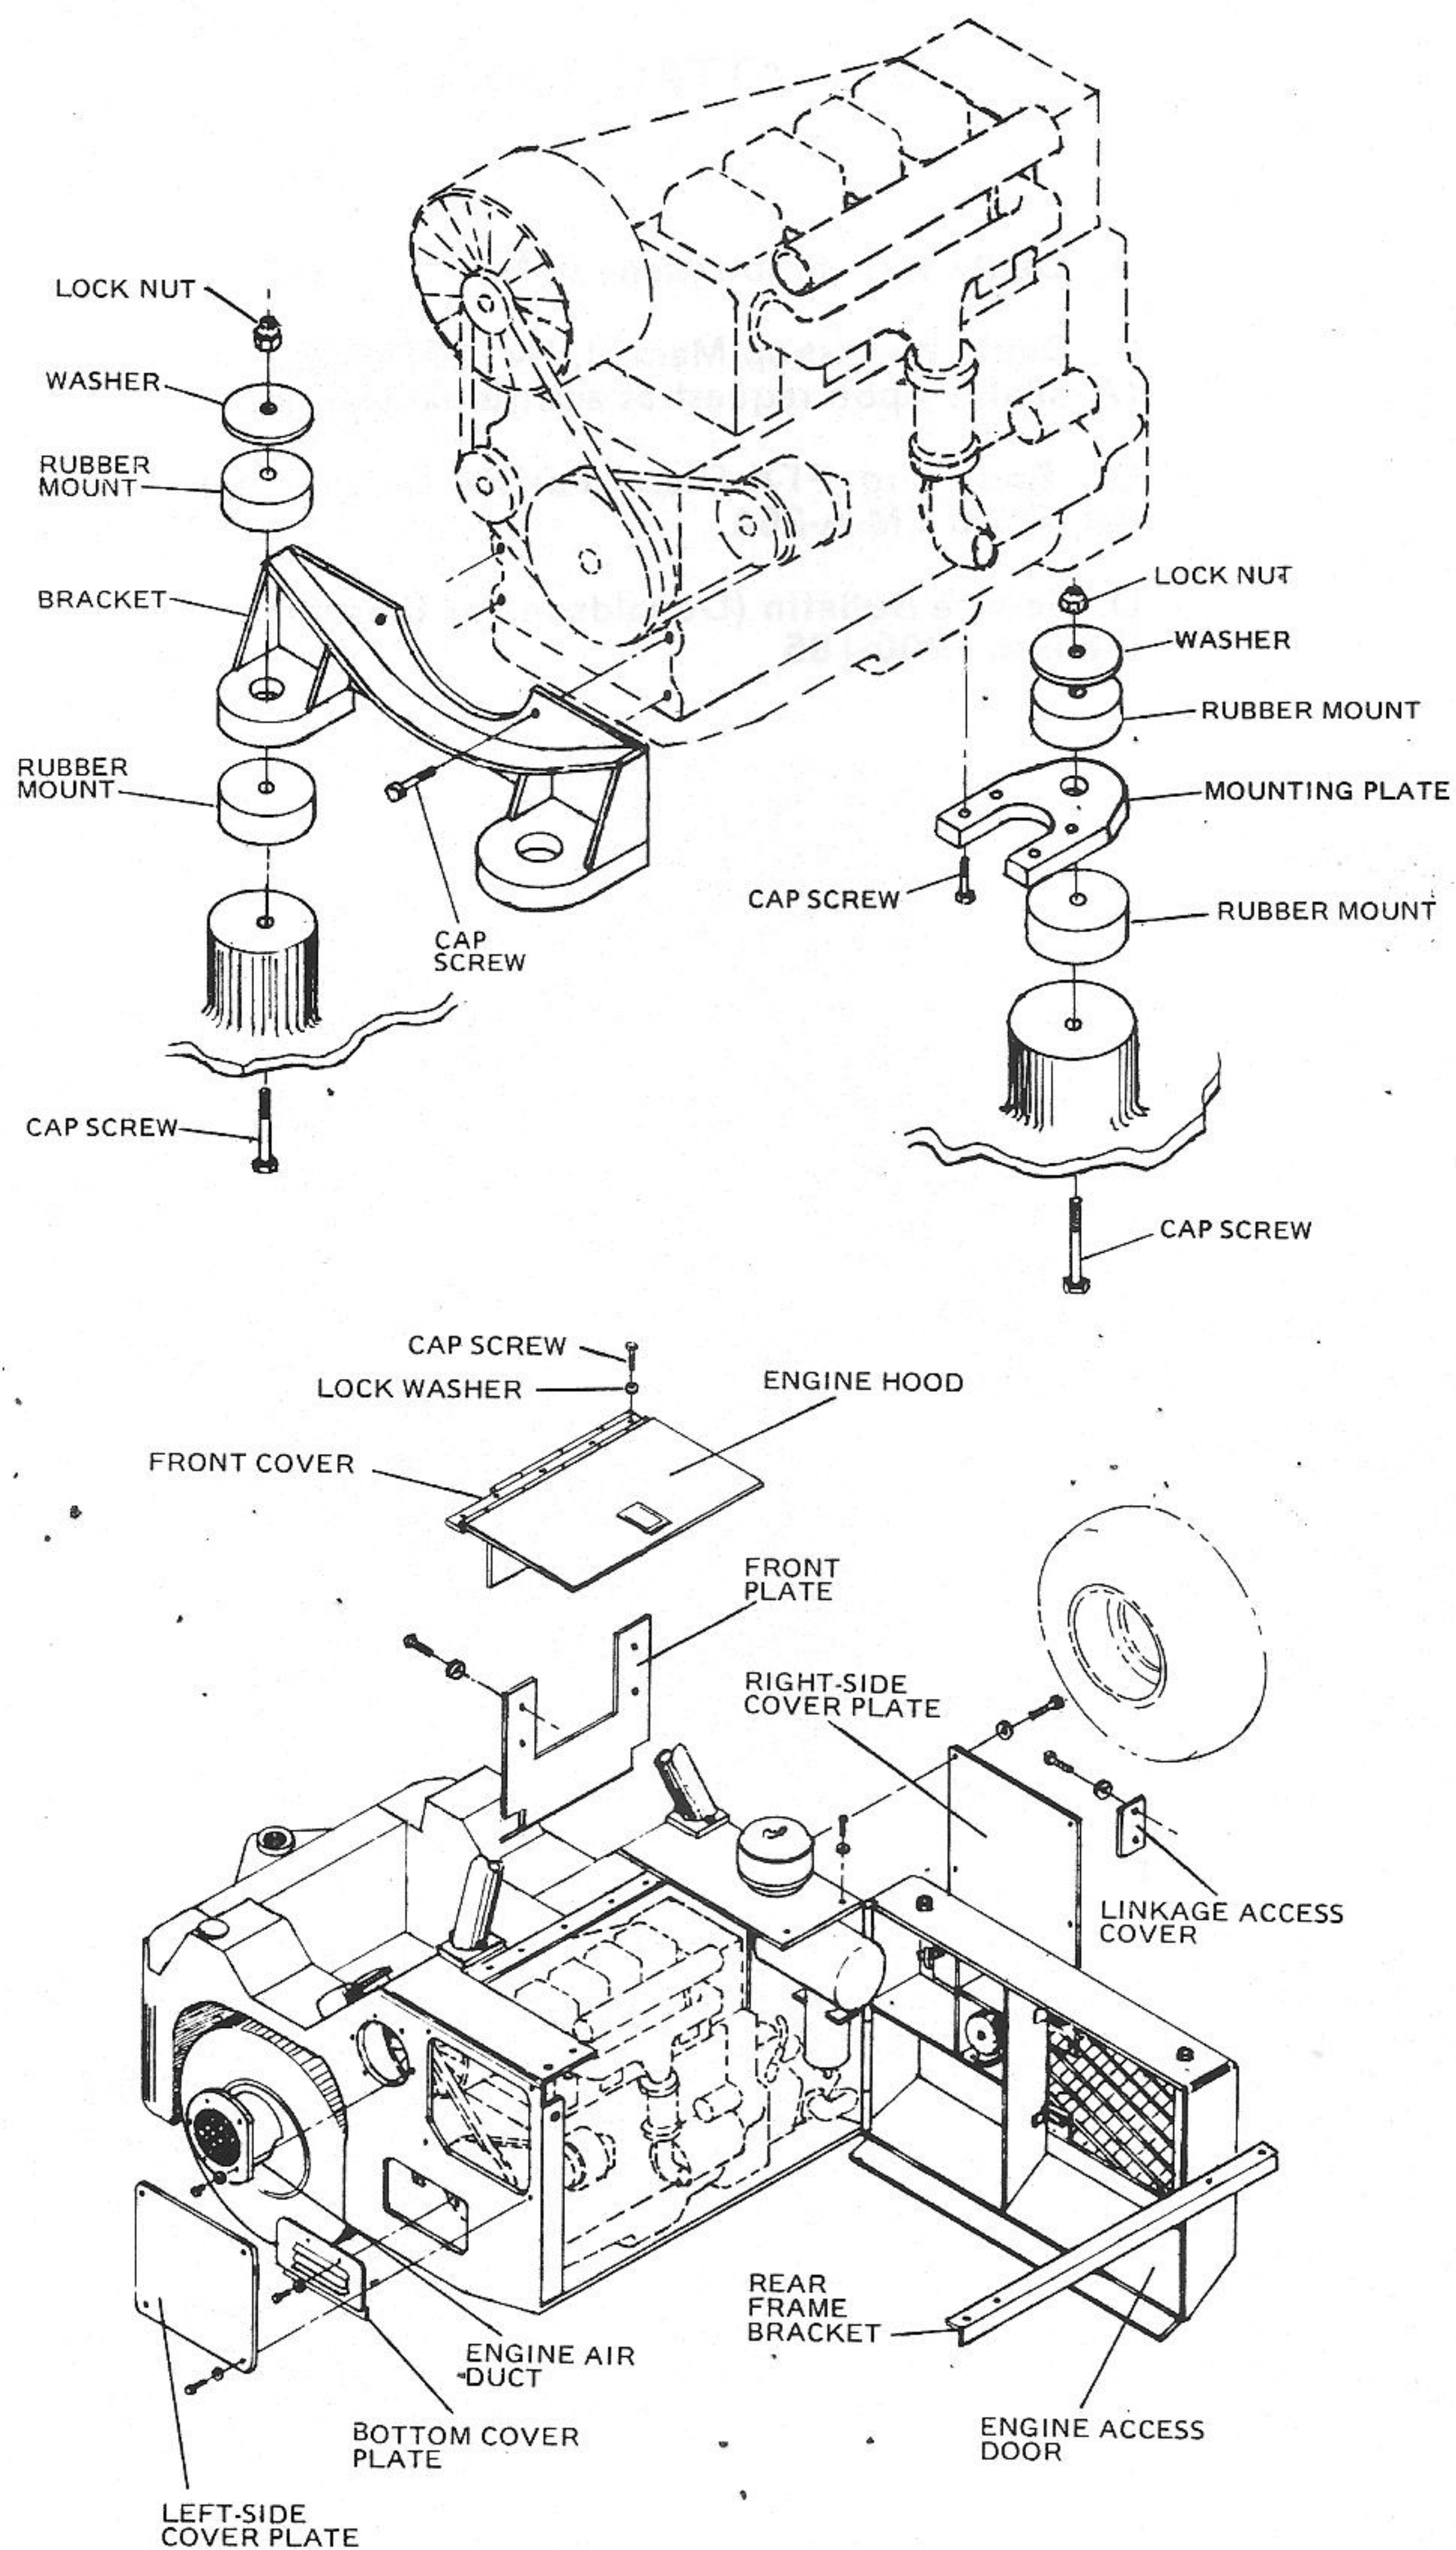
3. ENGINE MOUNT AND ACCESS COVERS
